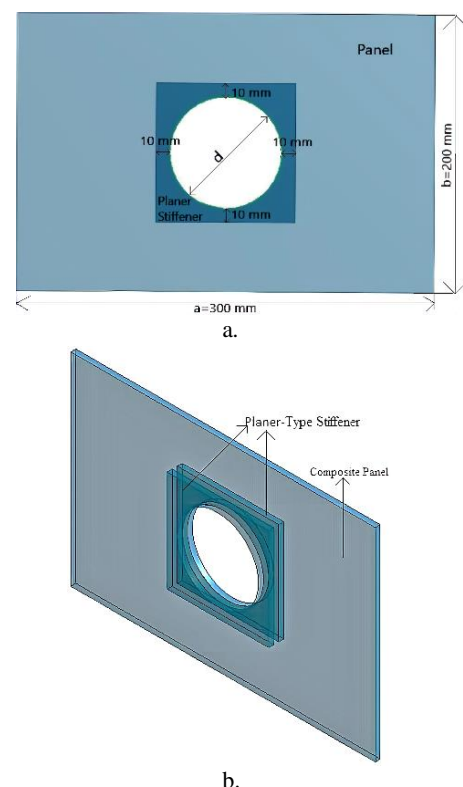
Composite panel with circular cutouts and reinforced stiffeners; a: 2D view of the composite panel with stiffener and dimensions, b: 3D view of the stiffeners bonded with composite panels
